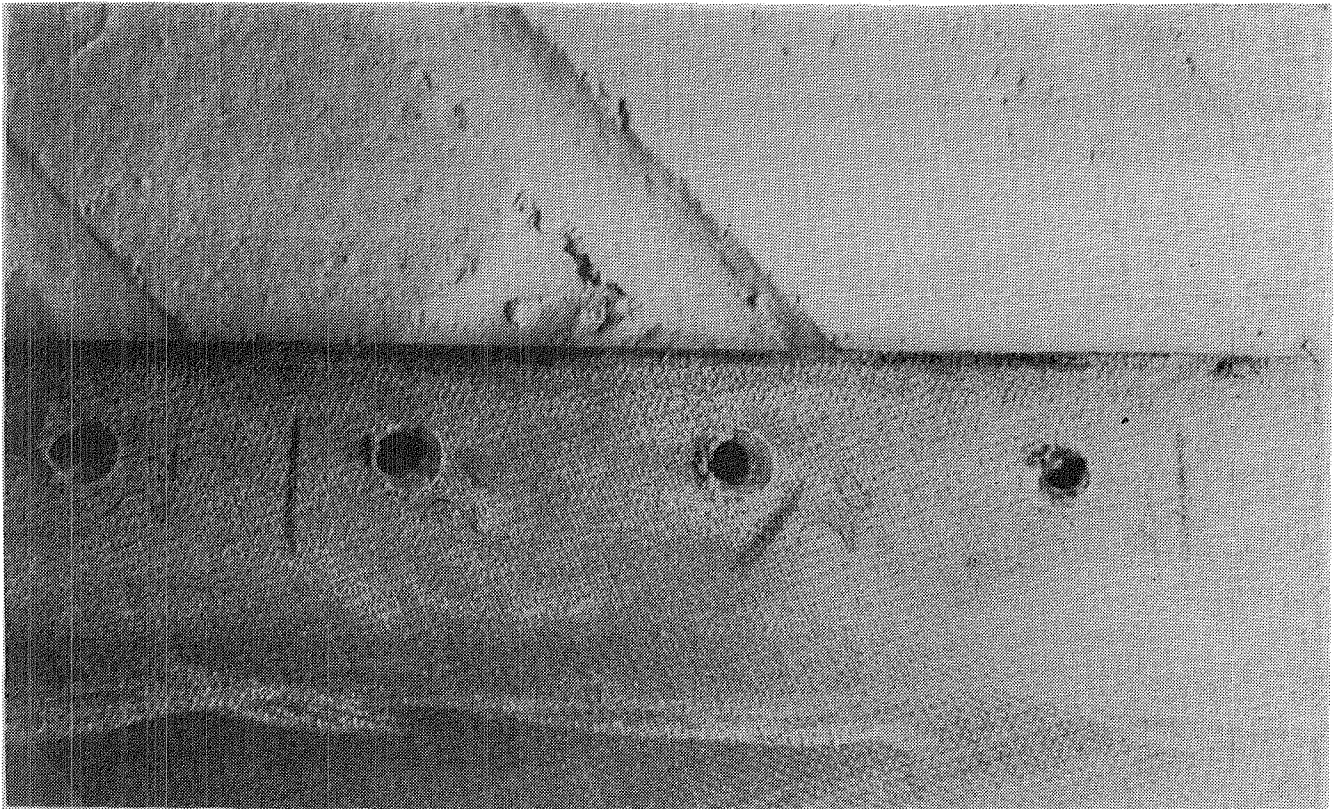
Eastern Left-Hand Aft Engine Fairing - Frayed Fastener Holes Along Edge.
